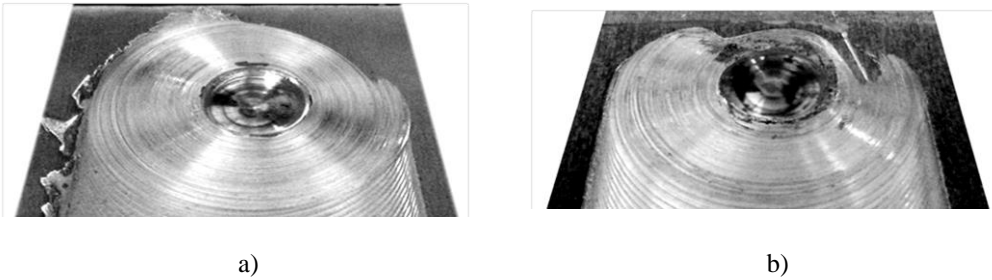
Contact area at the end of the AA6082 (a) and AA5083 (b) welds
